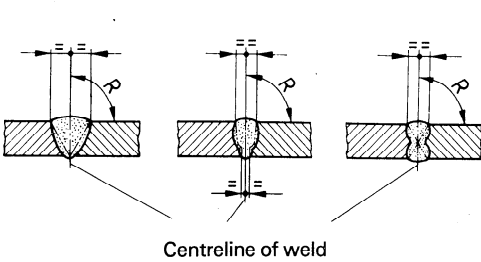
Examples of rotation ( $R = 90^\circ$ ) of symmetrical butt welds with horizontal workpiece surface
